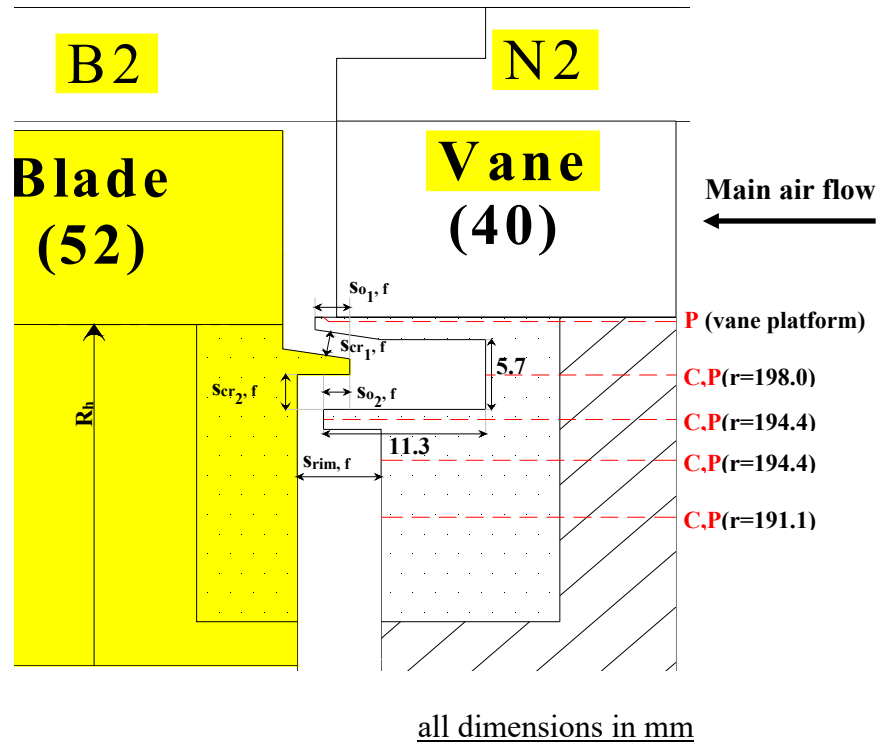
Front Disk Cavity- Rim Seal Geometry
